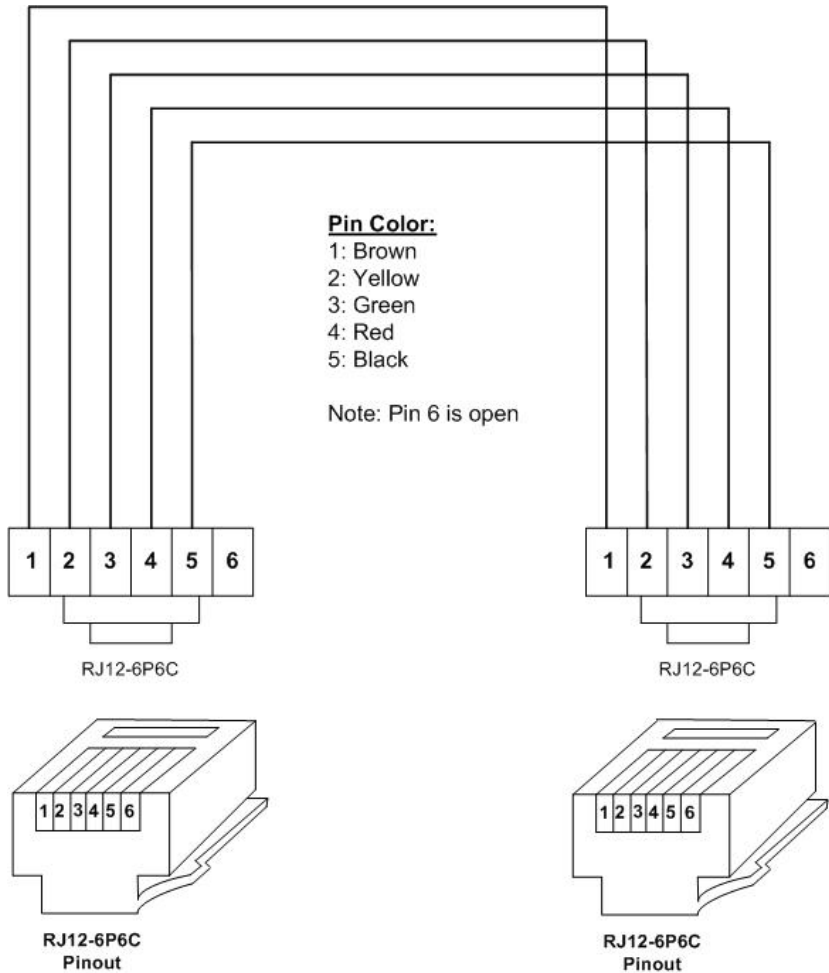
Interconnecting Wiring Cable between ELT Remote Unit and Main Unit, Part No. 4510041-5
